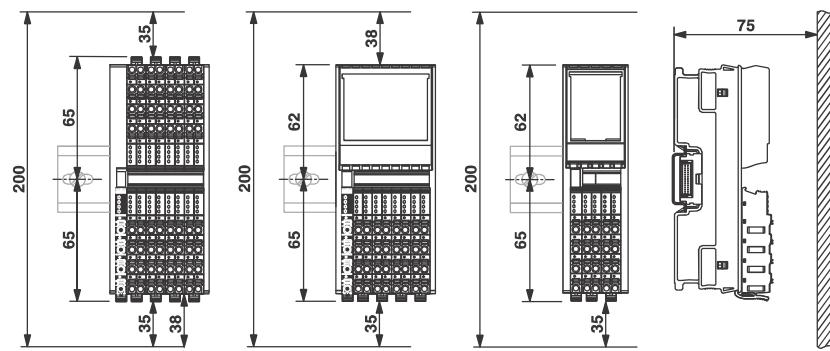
Mounting distances: I/O modules (dimensions rounded)
